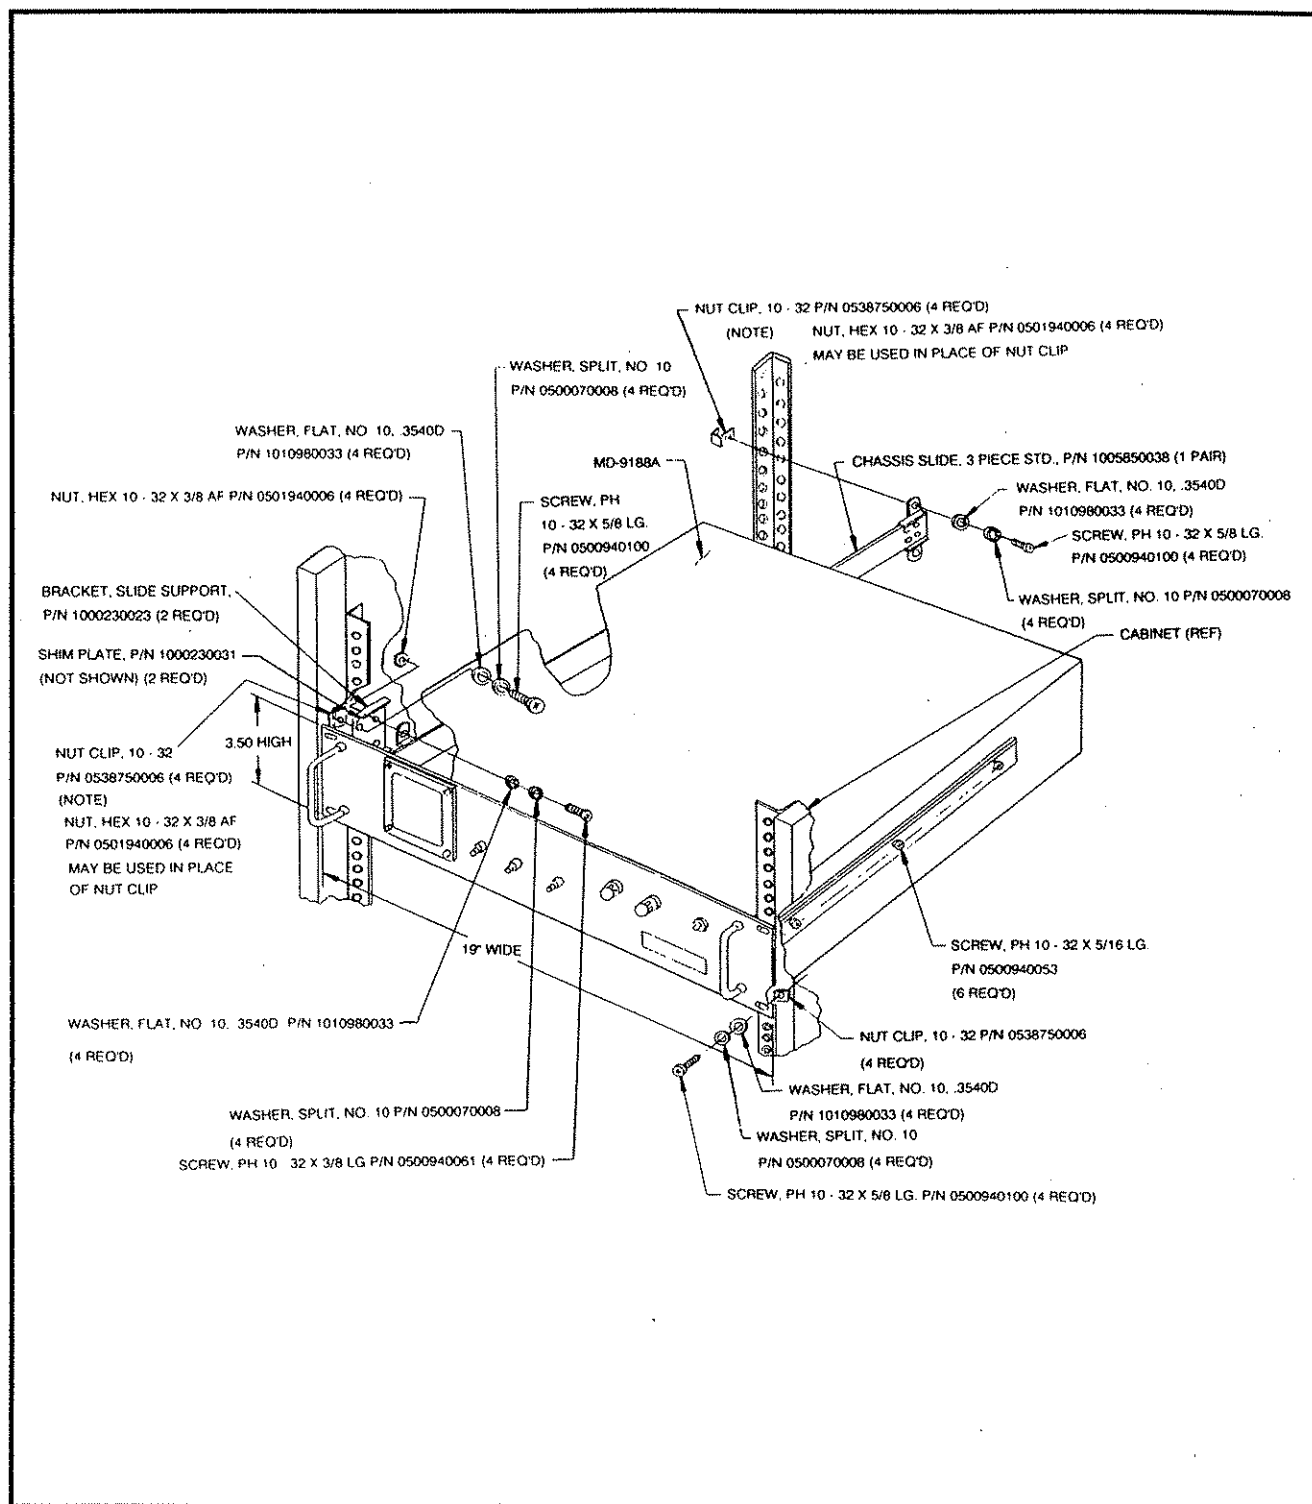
Installation of MD-9188A in Equipment Rack.
